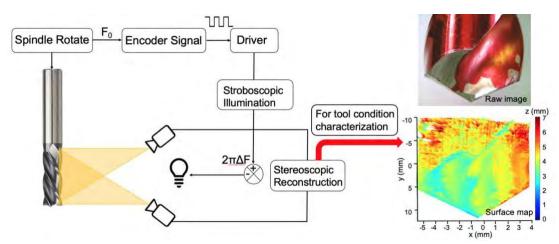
Methodology schematic of strobe-stereoscopy 3D imaging for Drilling/Milling tools metrology and inspection.
